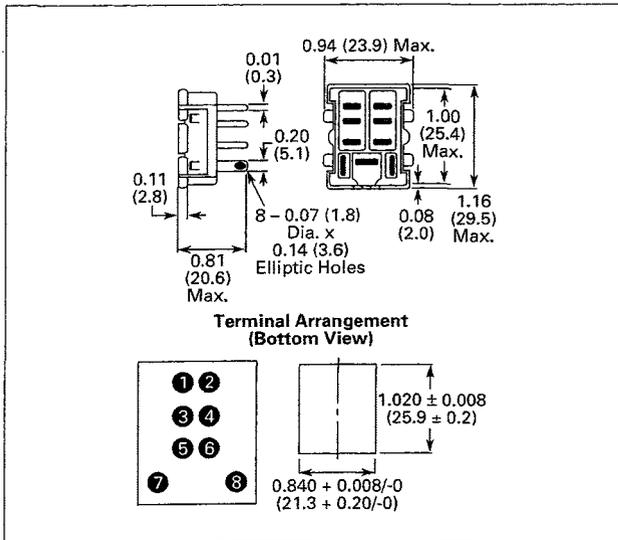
D7PA5 — Approximate Dimensions in Inches (mm)
